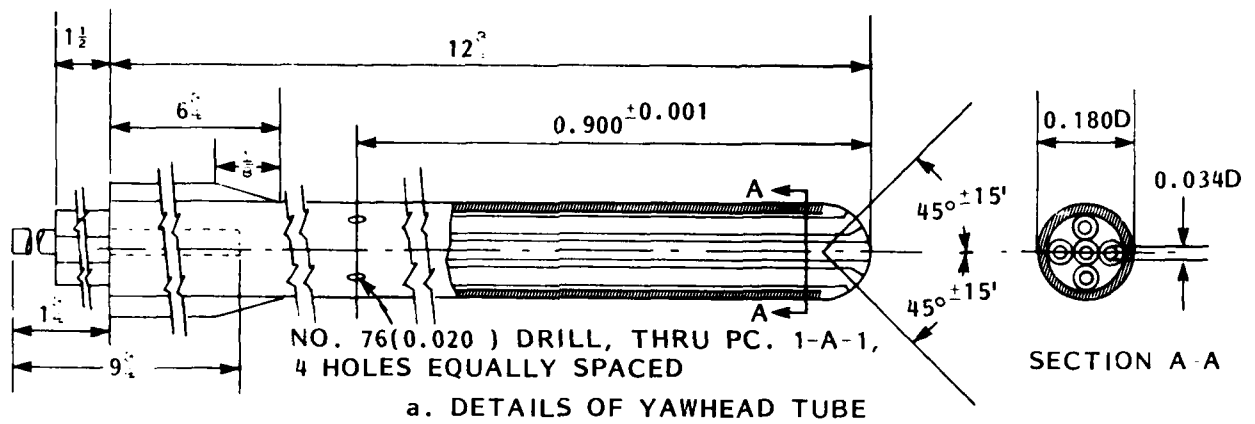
PITOT-STATIC YAWHEAD RAKE ASSEMBLY
